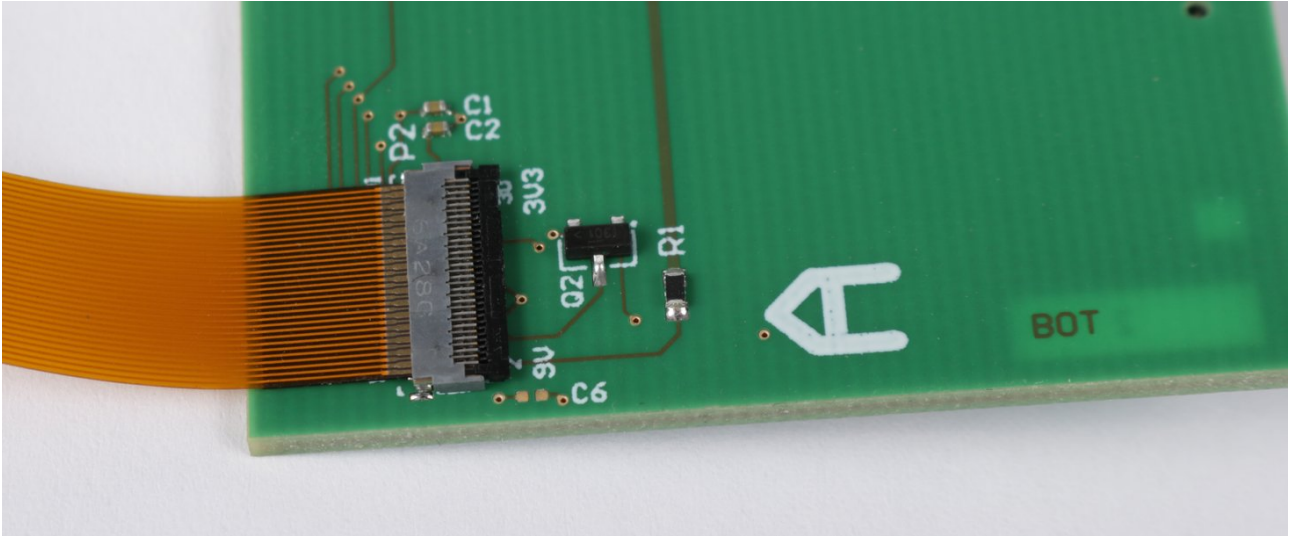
Connector P2 (DSI) on the DSI adapter PCB
